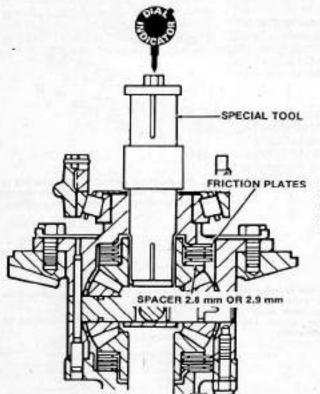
View showing special tool installation and dial indicator position to check Carraro front drive limited slip differential friction plate end play.
